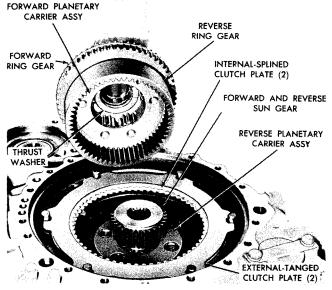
Installing forward planetary carrier assembly and attached parts (-3 model)
